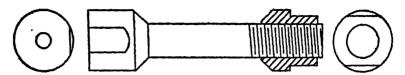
SPECIAL ARBOR FOR HOLDING TUBULAR WORK
